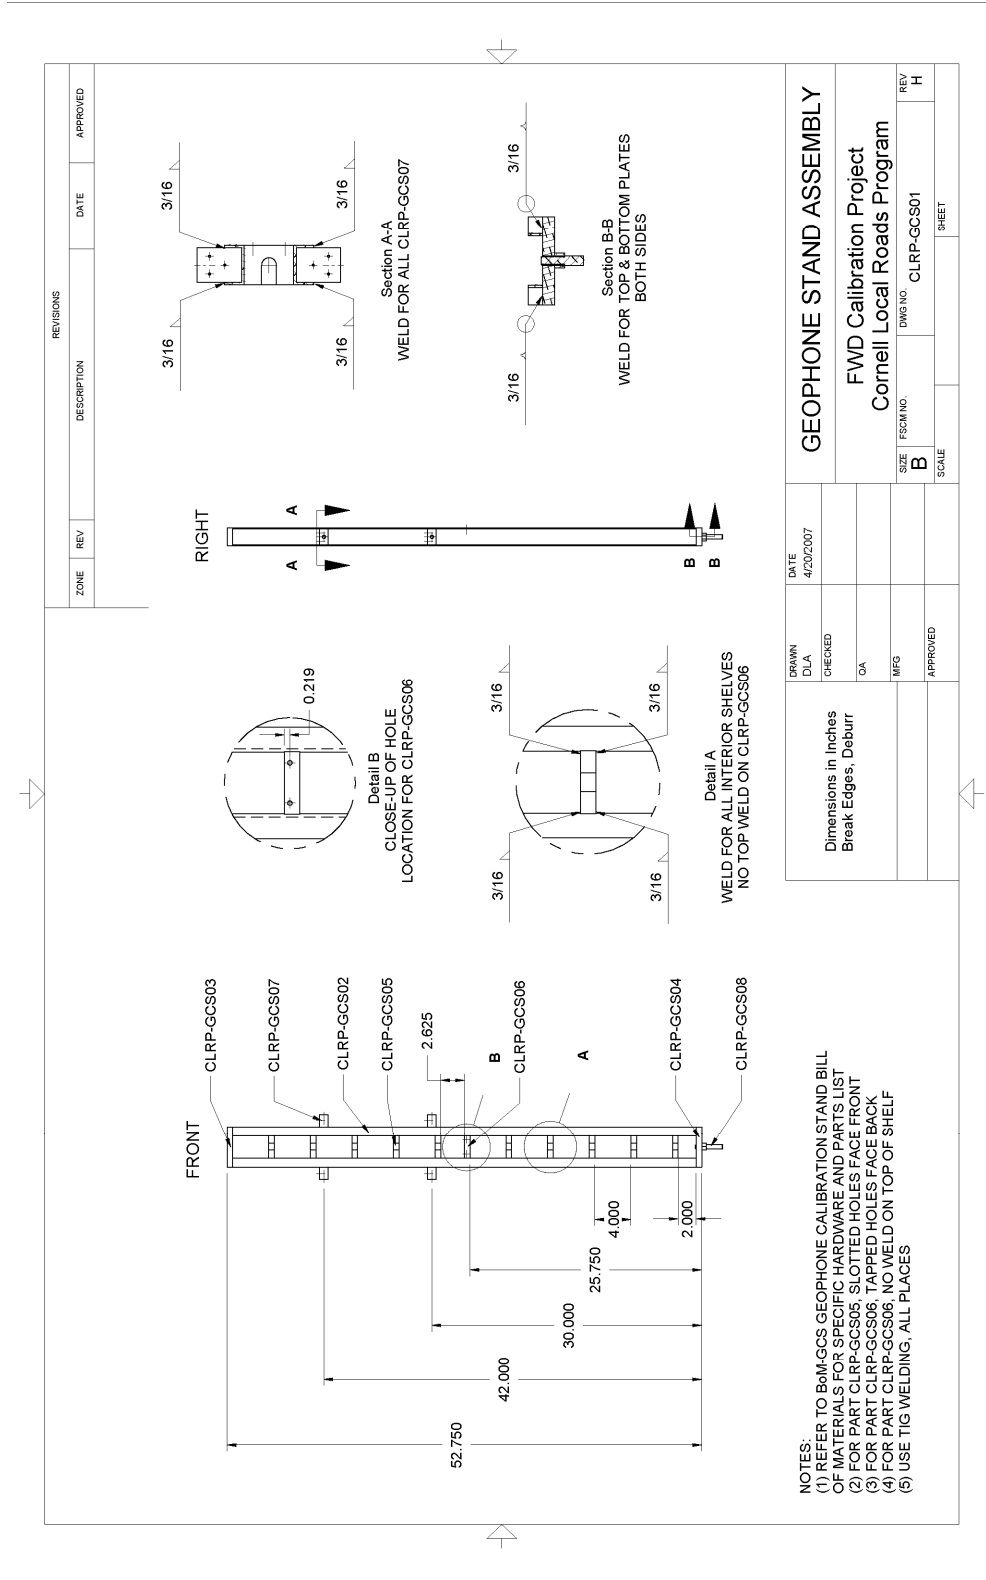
Drawing. CLRP-GCS01 Geophone Stand Assembly.
